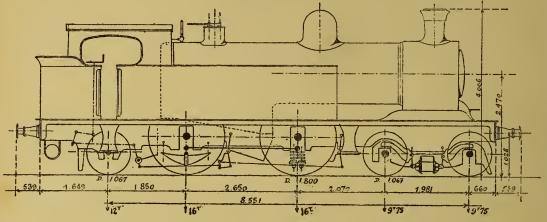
TEN-WHEEL SIDE TANK PASSENGER LOCOMOTIVE, TYPE 15, BELGIAN STATE RYS.
